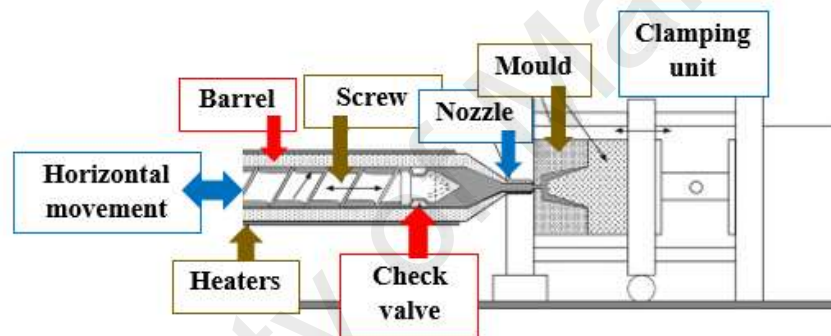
Injection unit of rubber injection moulding machine. Schematic diagram from Lorraine F. Francis (2016).
